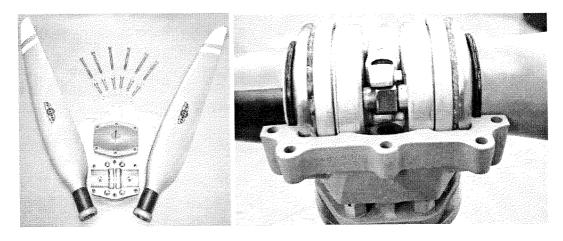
Ground-adjustable propellers – dissasembles and partially assembled
